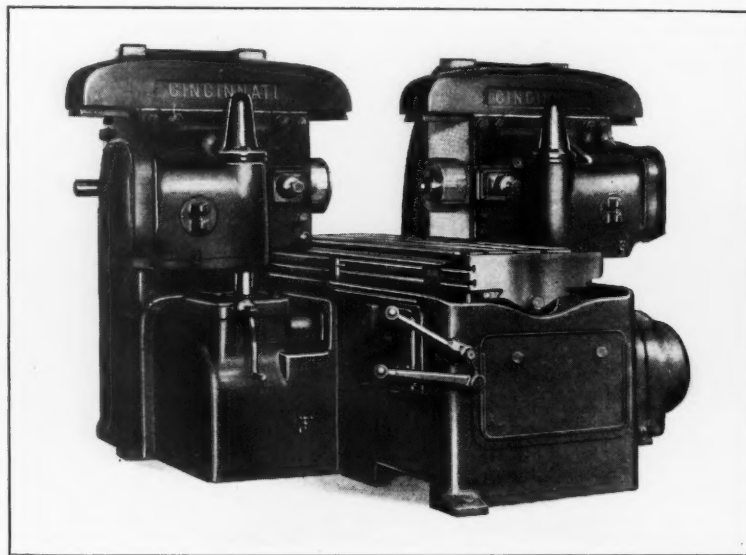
Duplex Type of Cincinnati Milling Machine Shown in Fig. 1
